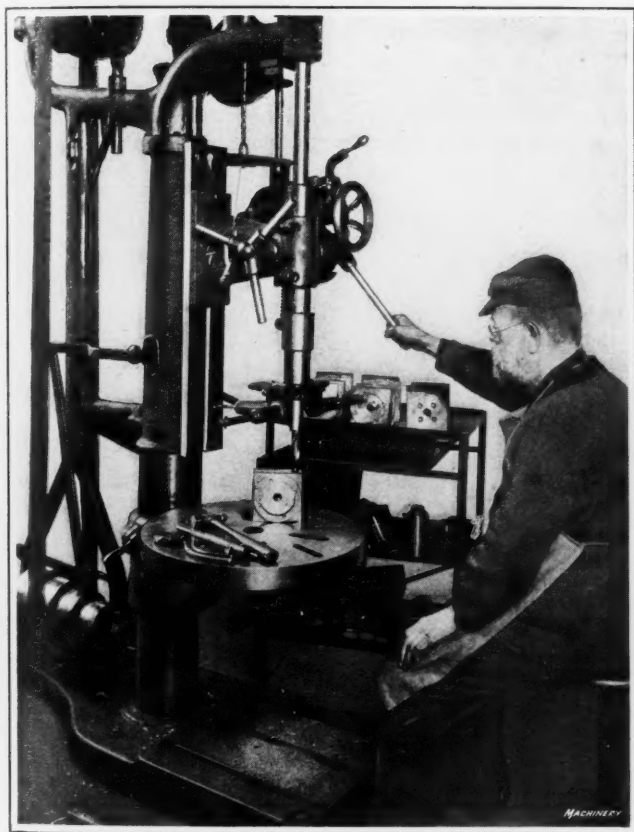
Auxiliary Turret Head built by Newman Mfg. Co. to adapt Single-spindle Drilling Machine for Rapid Performance of a Sequence of Operations
